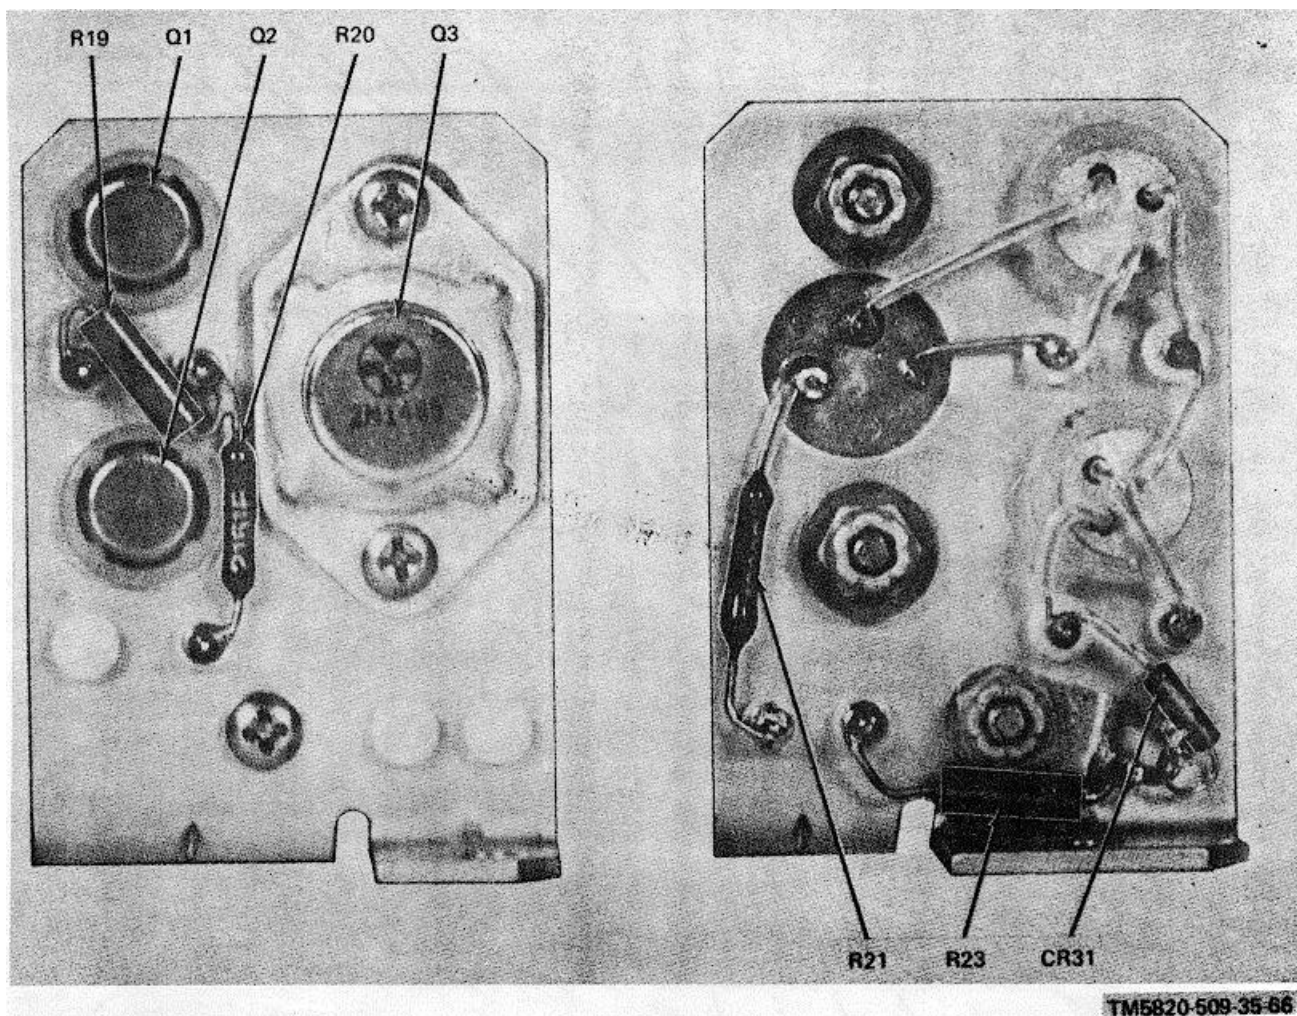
Power Supply PP-3518/PRC-47 (A8A5), Voltage Regulator Assembly TB1.
